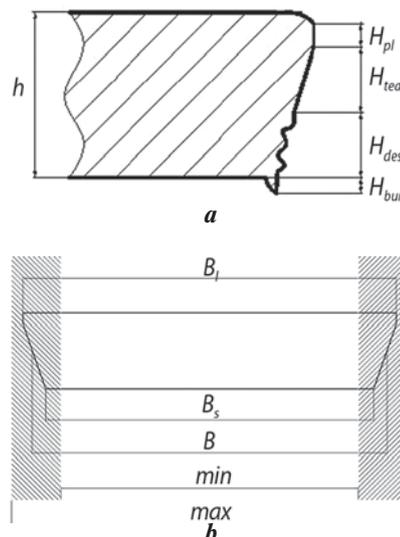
Defects of shape and deviations of cross section dimensions for a strip billet:
